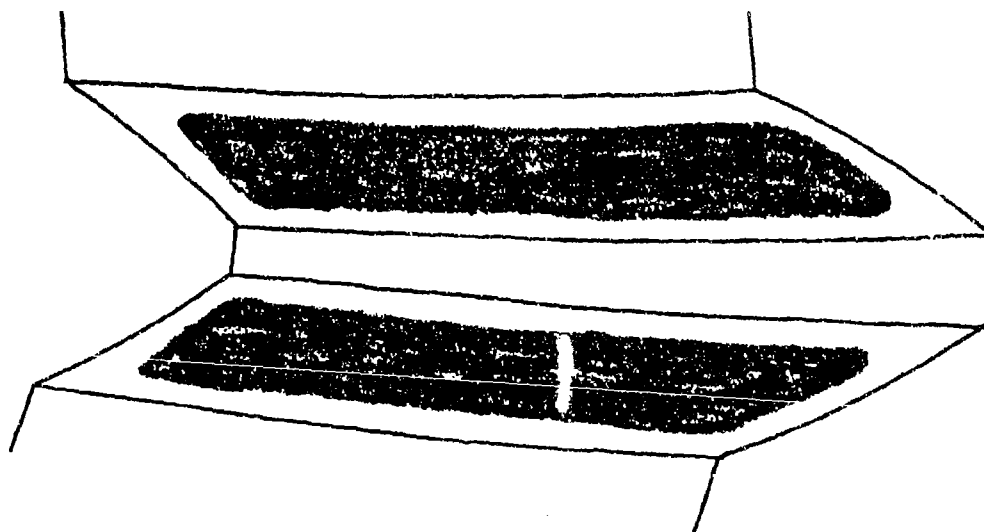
PREFERRED SPIRAL BEVEL GEAR BEARING PATTERN UNDER FULL LOAD
